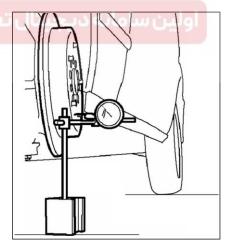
Measure Axial Clearance of Wheel Bearing
